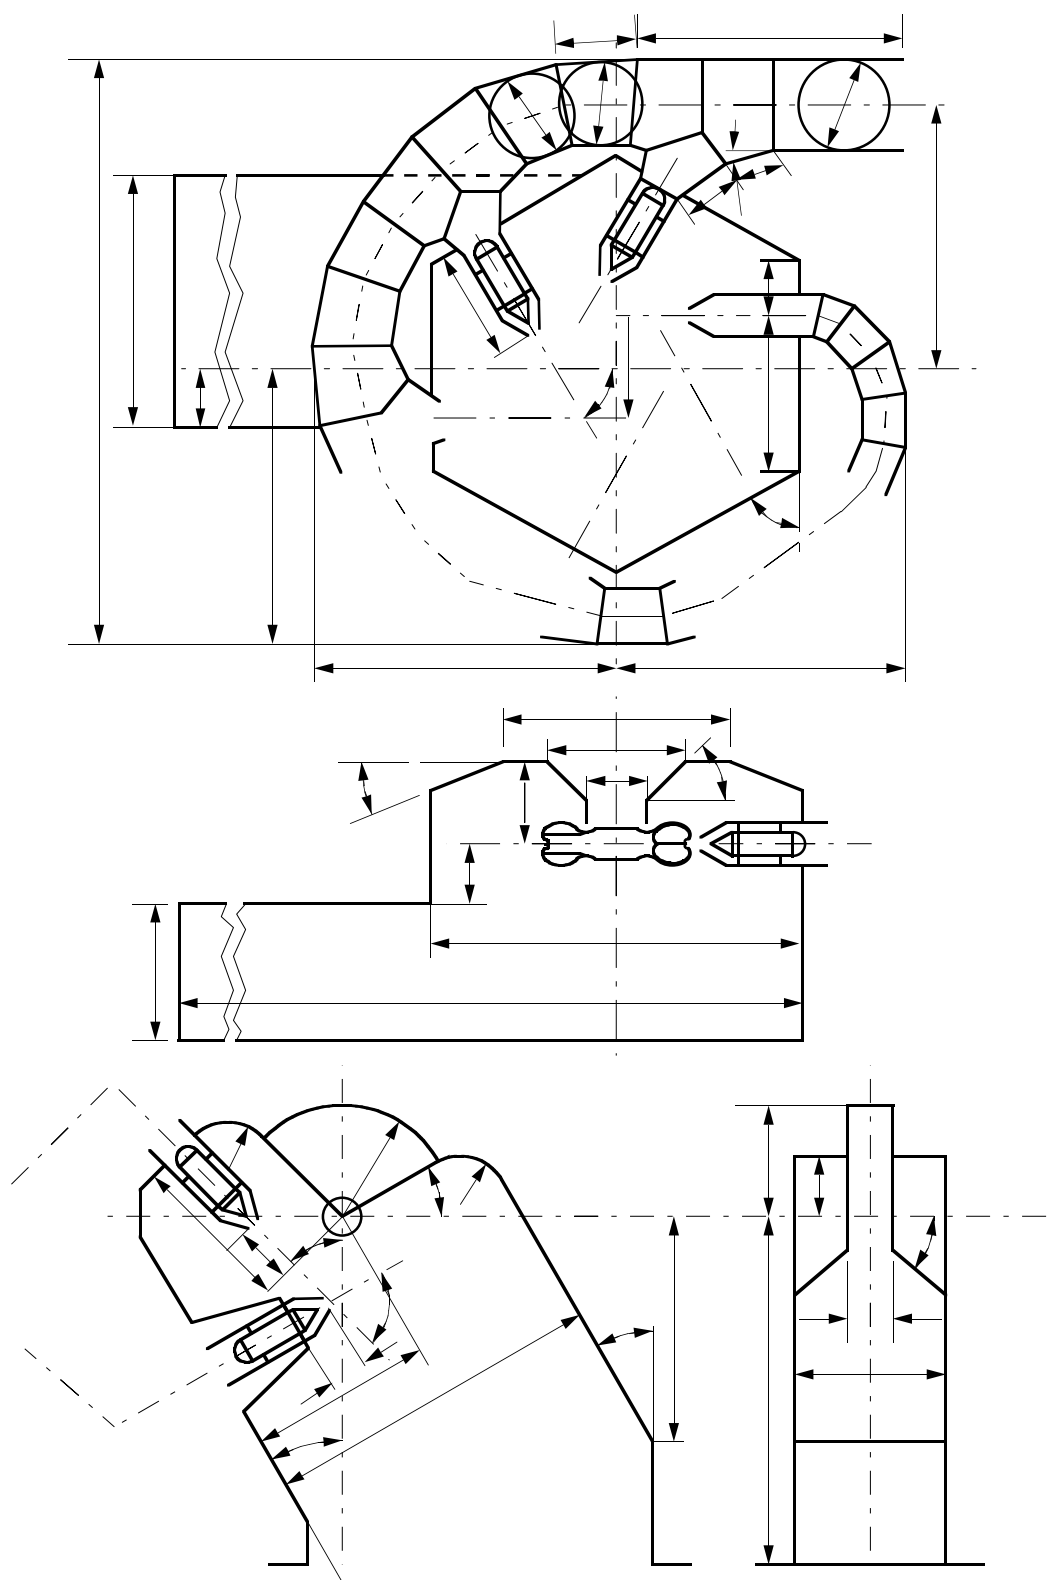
Pelton turbine: Example of dimensions to be checked on the distributor and the housing of vertical and horizontal shaft machines
